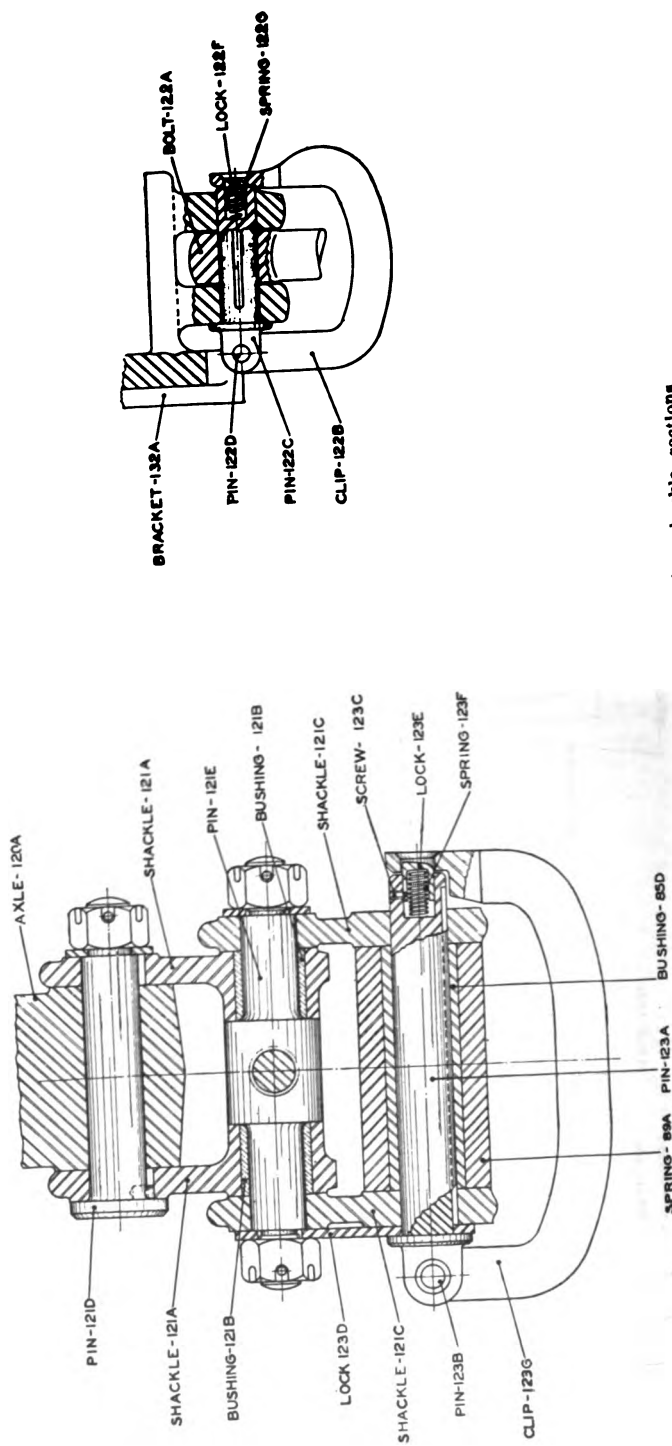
155-mm. gun carriage, M1918—spring shackle sections
